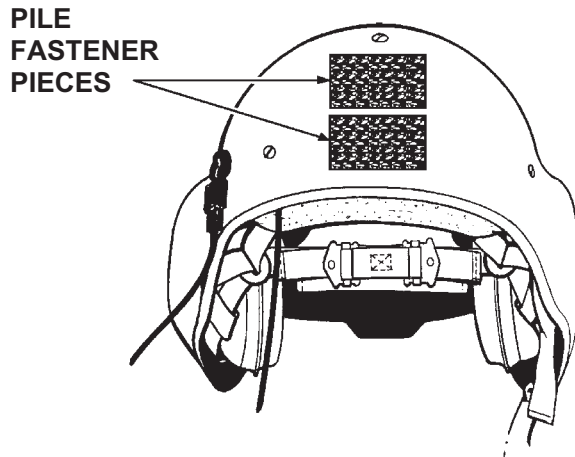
ANVIS Pile Fastener Pieces Installed
